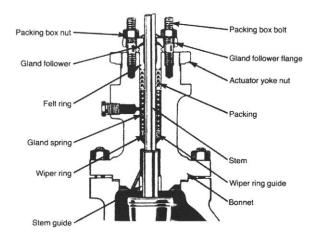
Typical bonnet assembly with spring-loaded chevron packing
